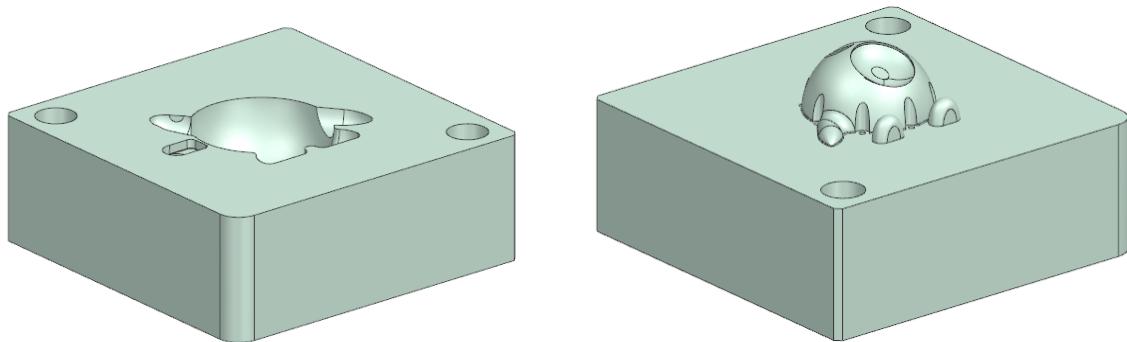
Core & Cavity for Kirby Front Half Molds
